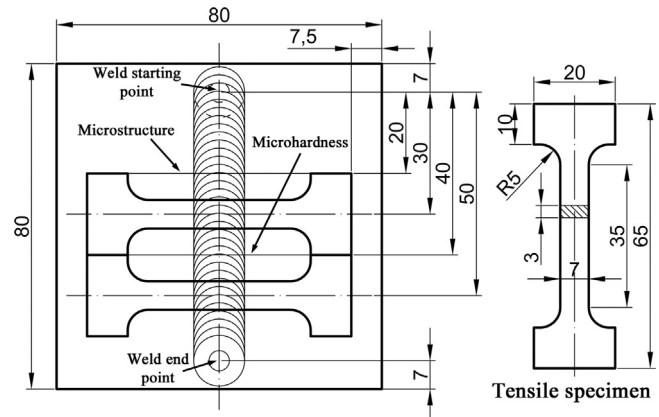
The weld and specimen dimensions. See Section 2 for details.
